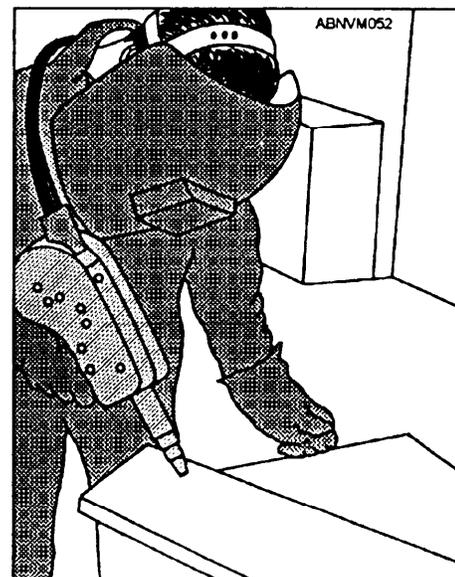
Positioning the GMA gun prior to welding.
